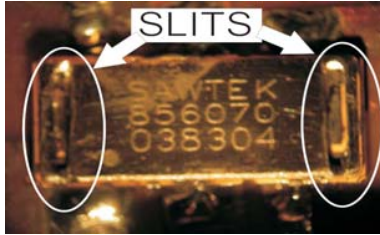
LiNbO₃ packaged device soldered to PCB with 1mm x 6mm slits in both ends of the package
